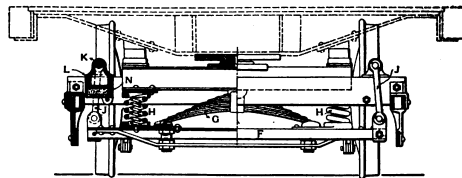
Half Cross-Section and Half End Elevation—14A Truck.
